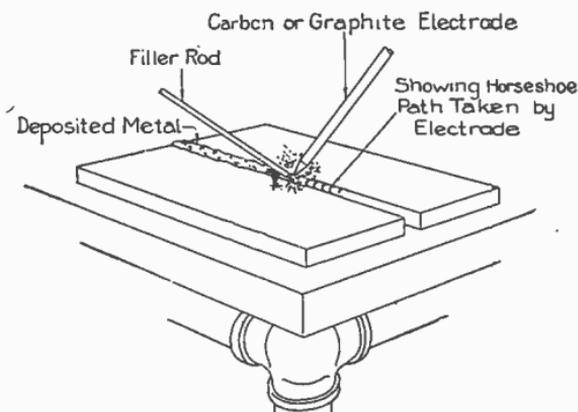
,107.—Electrode travel in making a butt weld with the carbon arc.
